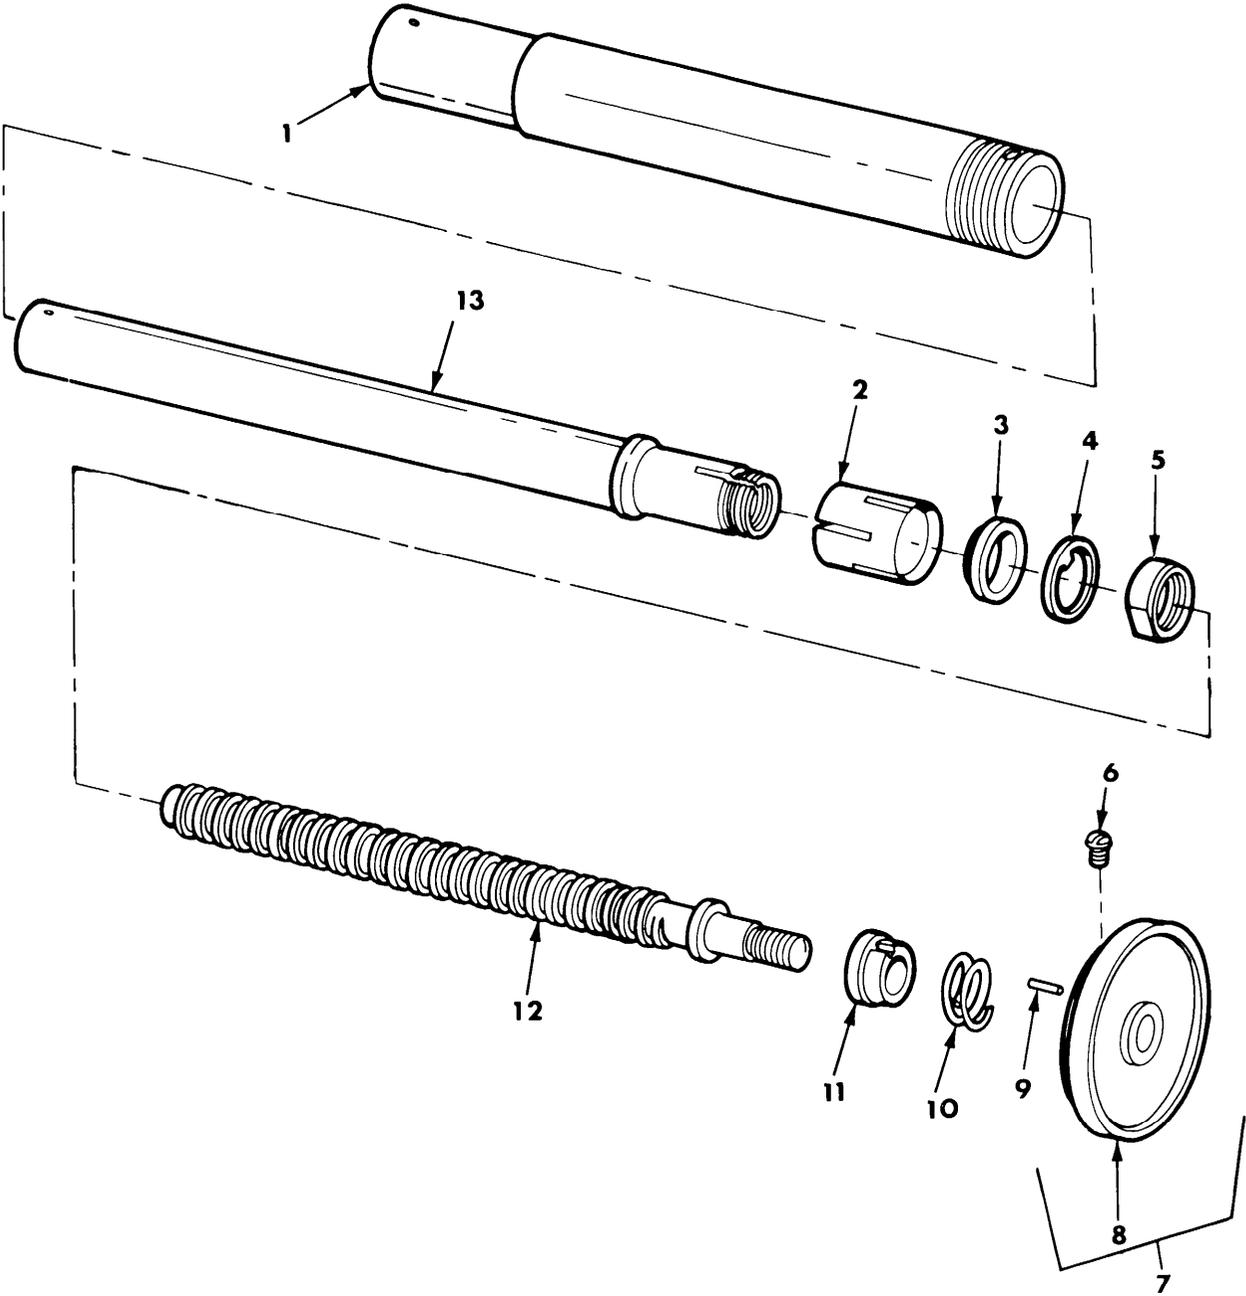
Traversing Spindle Assembly 7308532 and Cap Assembly 7308278.
